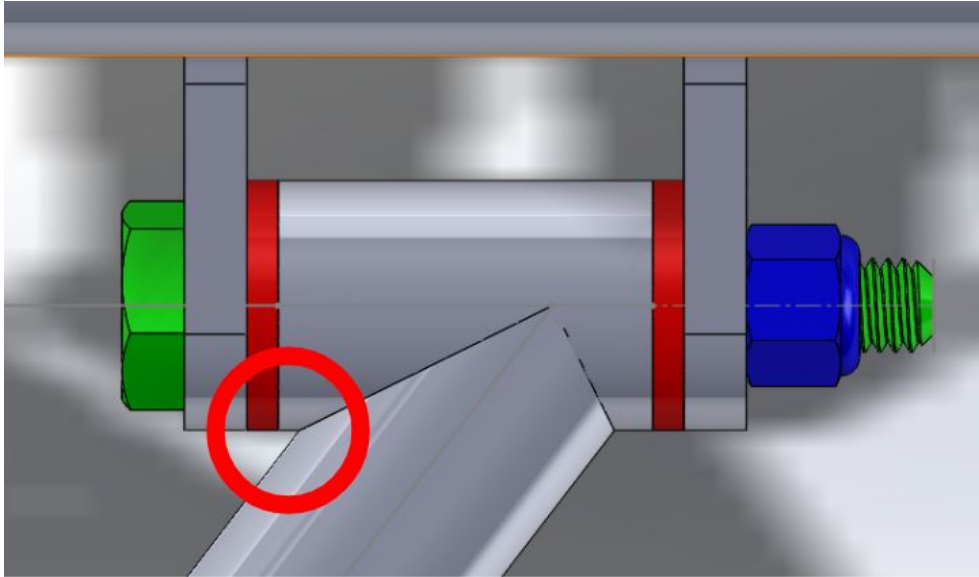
The angled bar of the suspension control arm leaves little room for error while welding.
